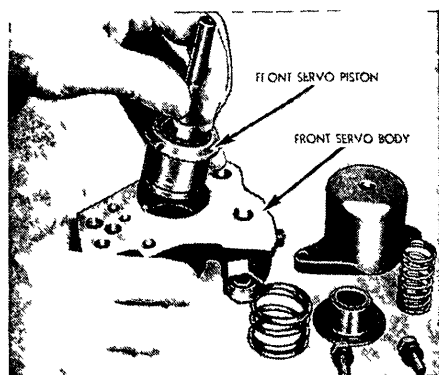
Take front servo piston from servo body. Do not disassemble piston as it is serviced as a unit
